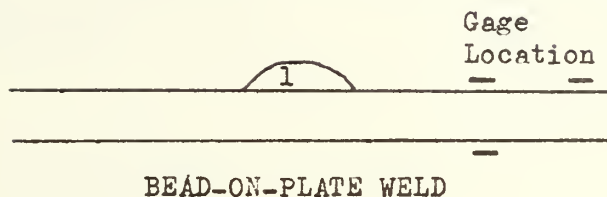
WELDING PASS SEQUENCE.
